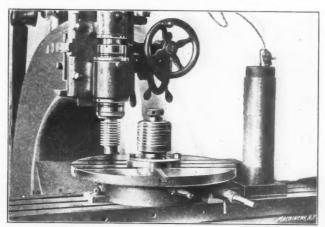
Cutting out Piston Rings in the Vertical Milling Machine
